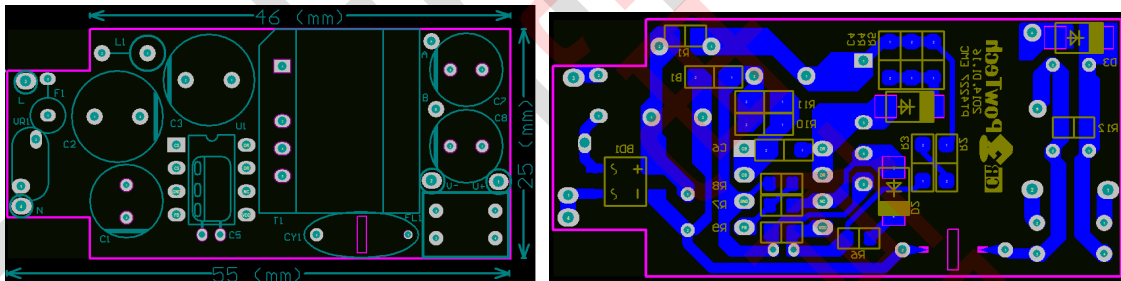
PCB LAYOUT (55MM*25MM*1.2MM)
